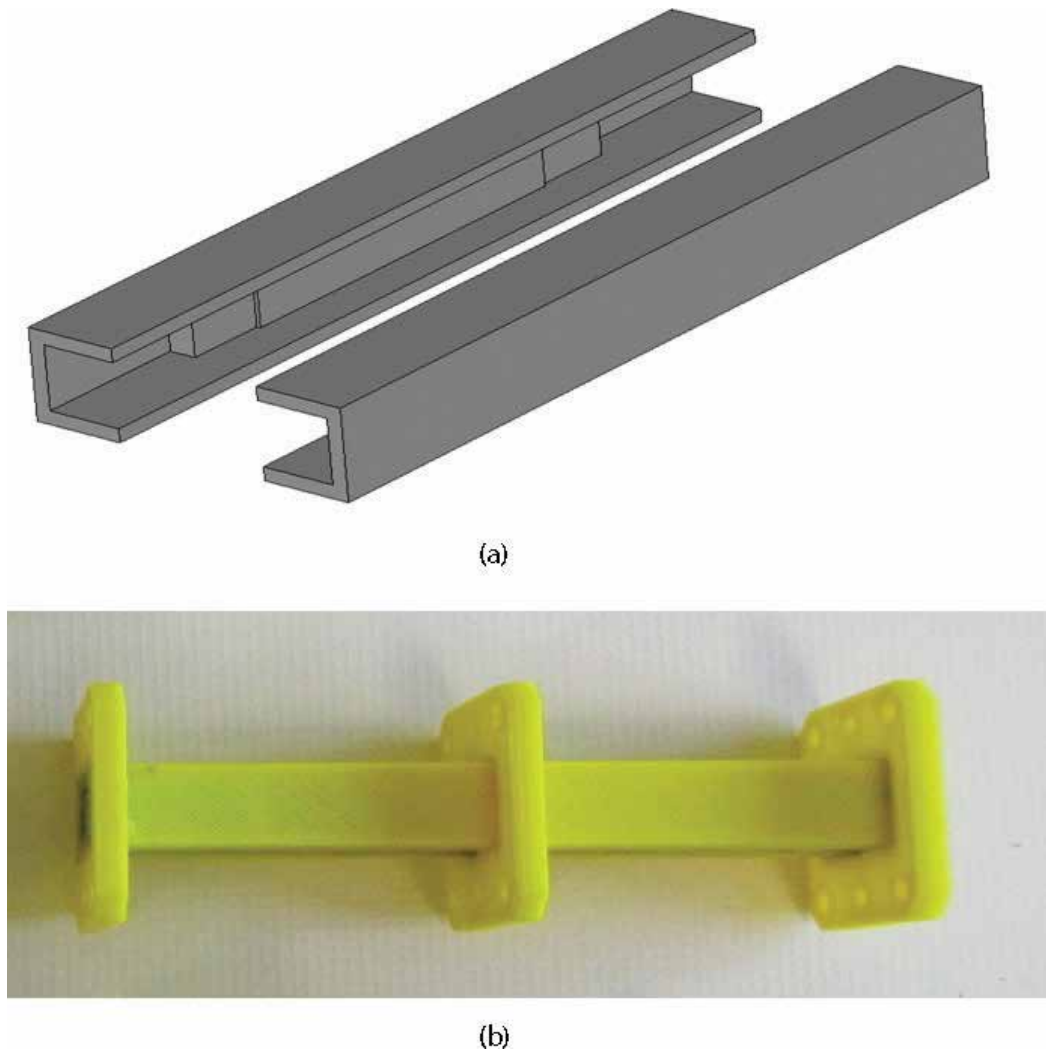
(a) CAD pieces and (b) assembled high-pass filter.
